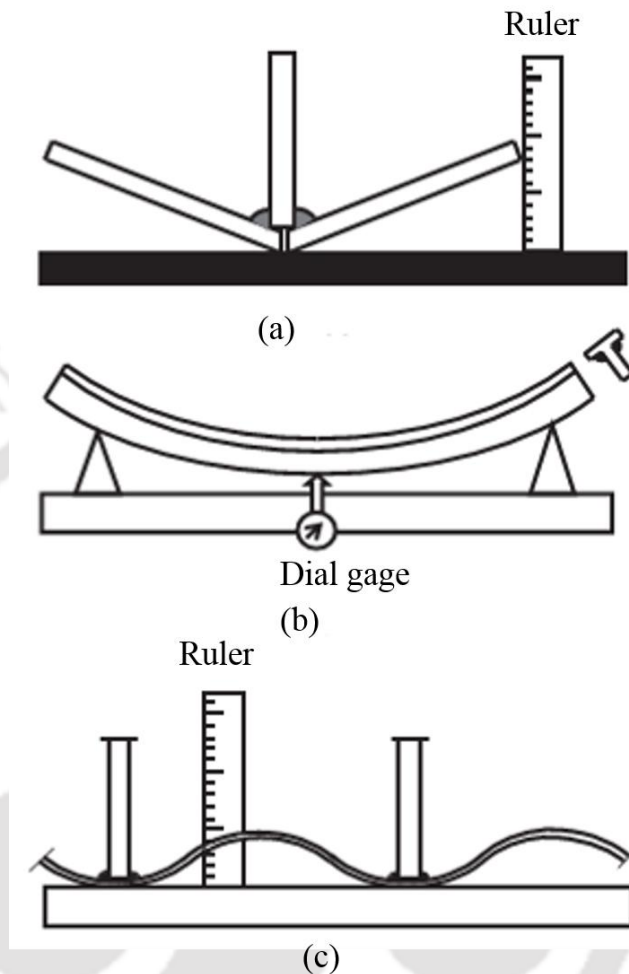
Distortion measurement in the post-weld cooled state: (a) angular distortion; (b) bending distortion; (c) angular shrinkage of panels welded with stiffeners [180].
